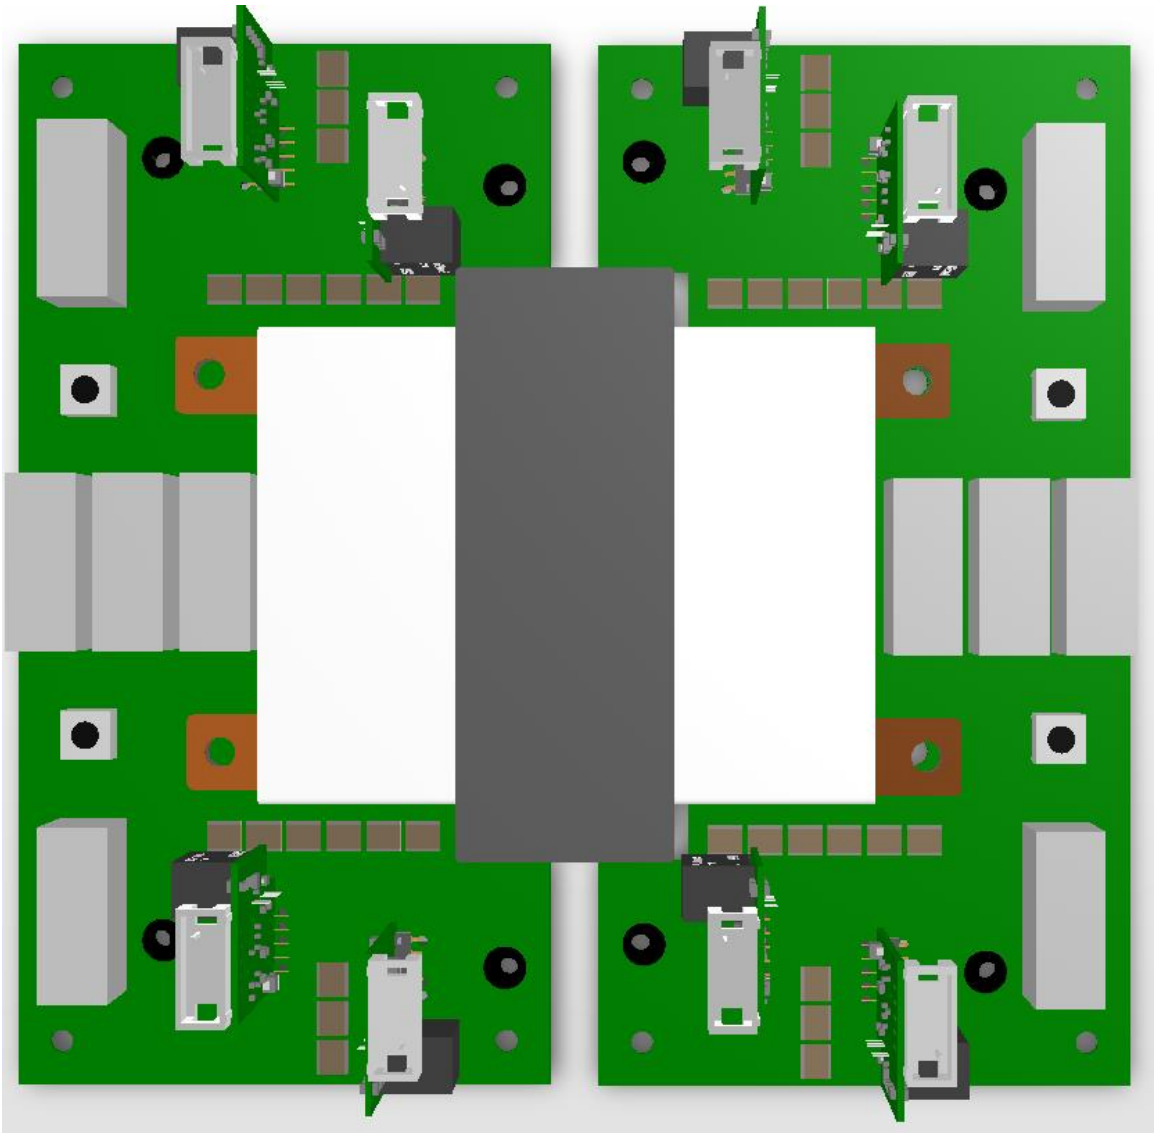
3D rendering of converter assembly with modular gate-driver boards.
